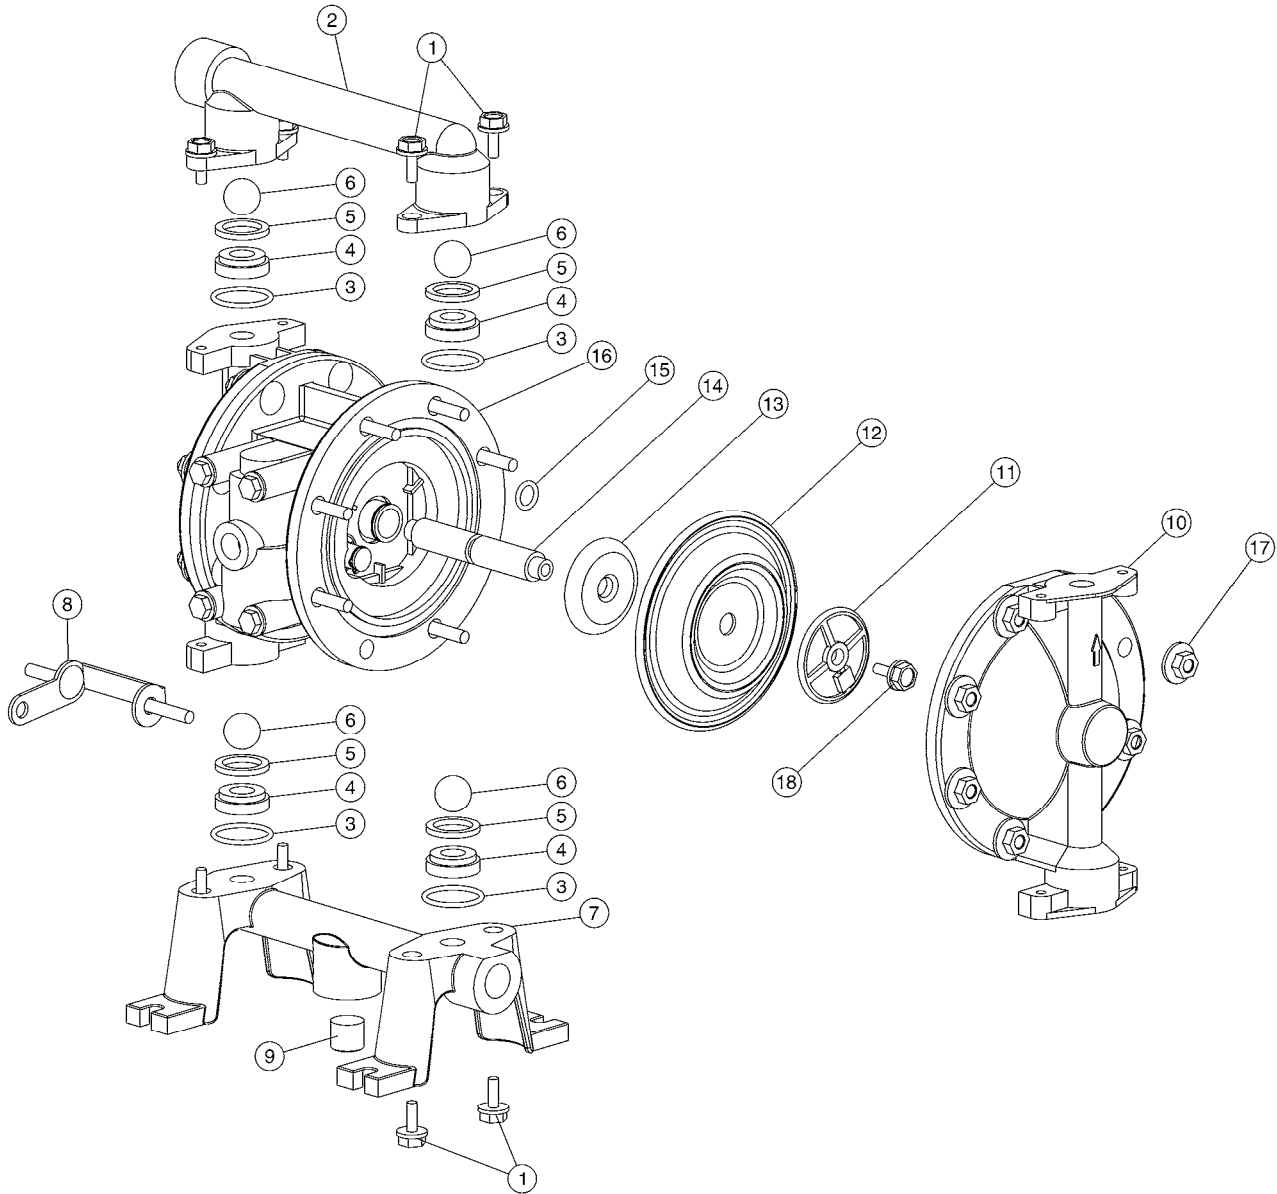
Exploded view of the fluid section of the Pneumatic Diaphragm Pump.
